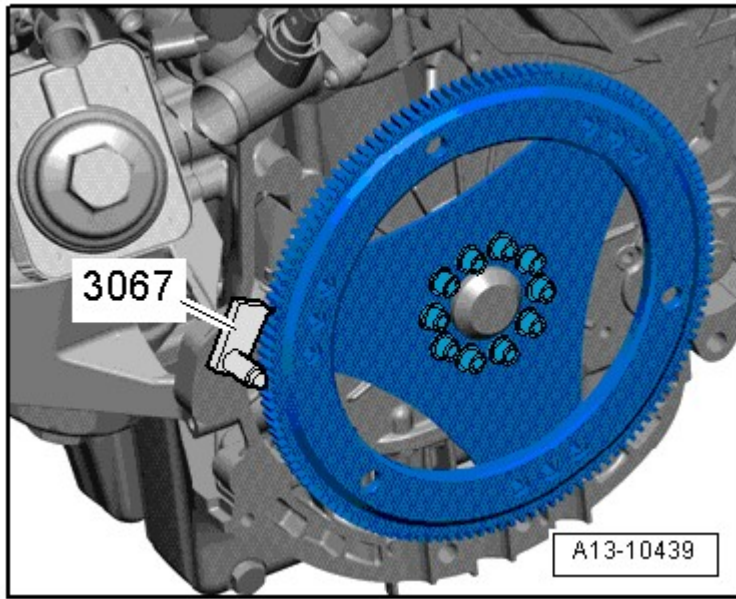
Identifying Counter Hold 3067 To Loosen Drive Plate Bolts
